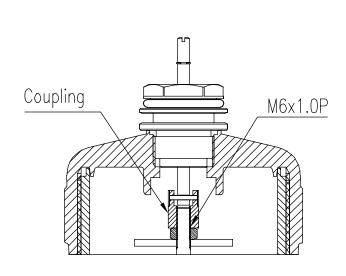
TMP-3000 Feedback Shaft Assembly
